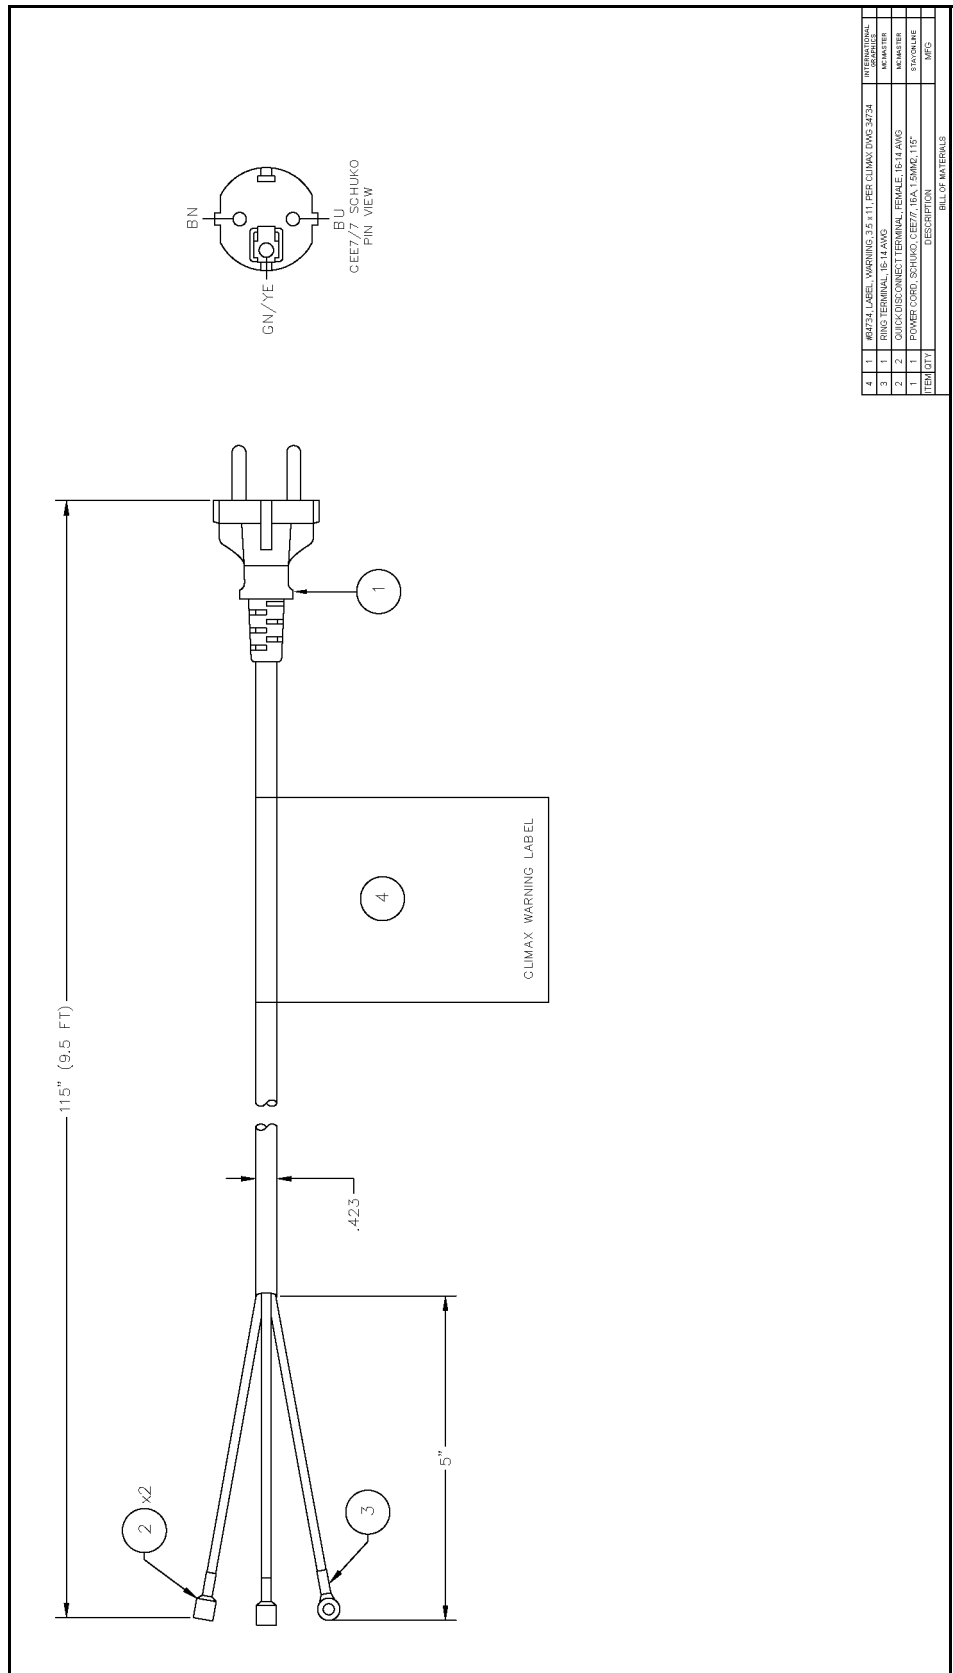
BB5000 EIBENSTOCK POWER CABLE ASSEMBLY 2ND GEN 230V CE CEE7/7 SCHUKO PLUG (P/N 88654 E00174)
